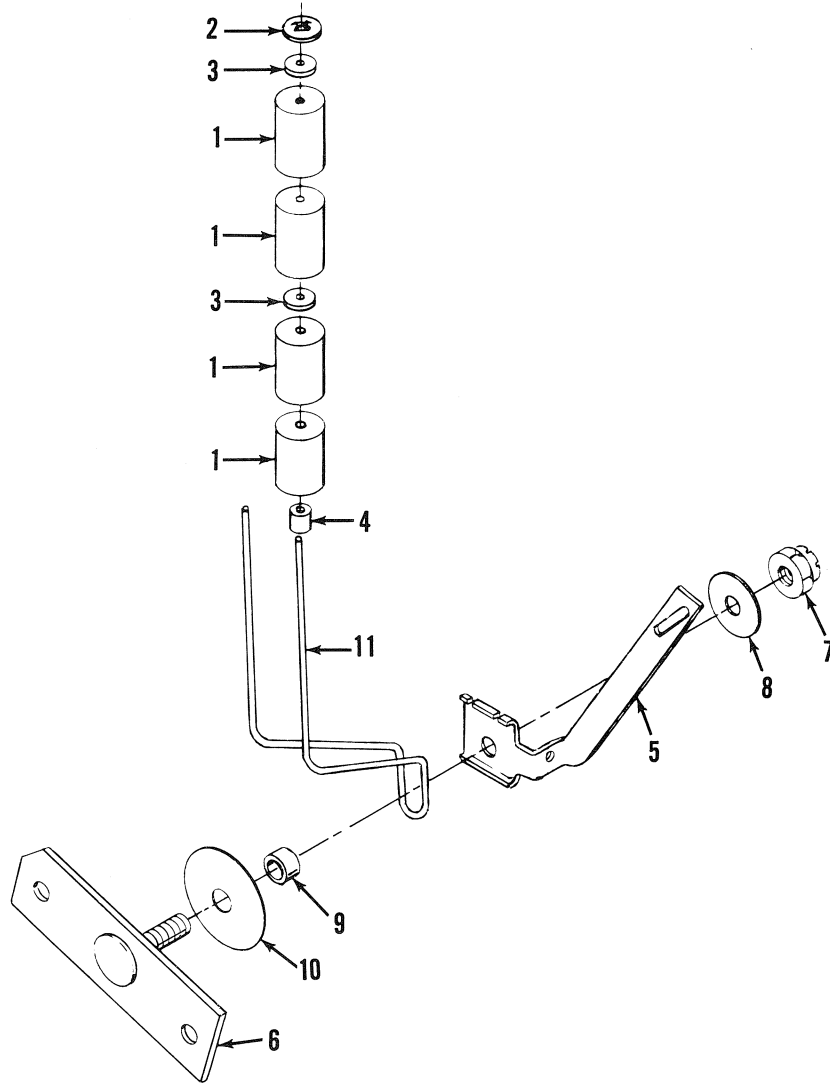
DRIVE BELT SHIFT FORK ASSEMBLY
